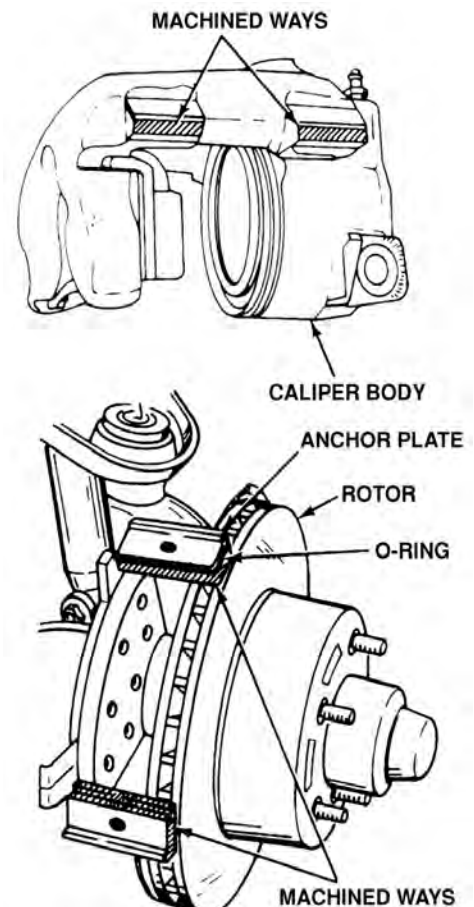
Make sure the machined ways of a sliding caliper are clean and smooth, then lubricate them with a thin coat of high-temperature brake grease.
